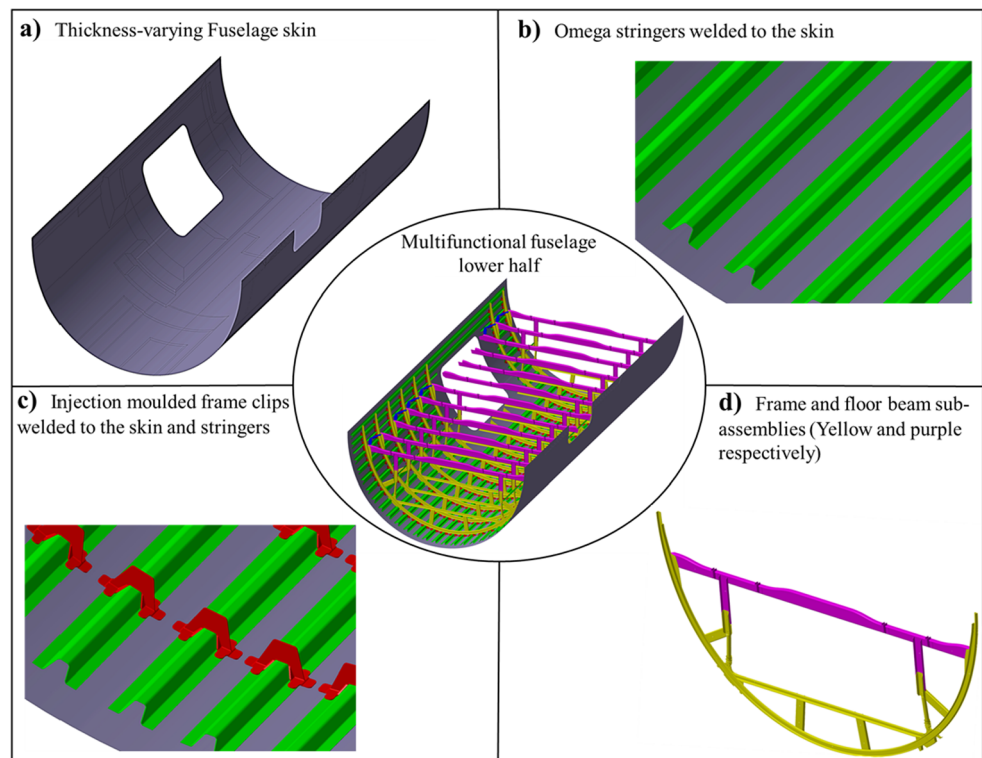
(b). These stringers will be welded to the skin by a long weld conduction technique developed by GKN-Fokker Aerospace [18] under GB1714799.2 patent [27]. This patented welding tool comprises an elongated flexible heat conductive strip and an elongated heat sink to allow reliable composite welding even with local thickness variation and shallow ramps (such as in the skin) compared with conventional welding tools [27]. To weld, the tool applies heat at the external surface of the stringers’ flanges to join the interface with the skin. This weld head is attached to the adaptive tool illustrated in “Long welds adaptive assembly tool.” On the other hand, the placement of the stringers on the skin and their tack weld is illustrated in “Jig-less assembly end-effector.”
